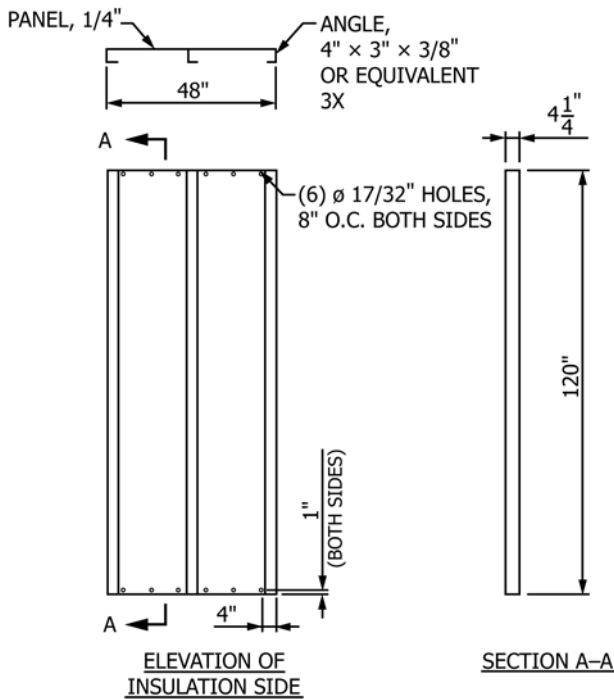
Aluminum Test Specimen Construction Details for A-Class Bulkhead
